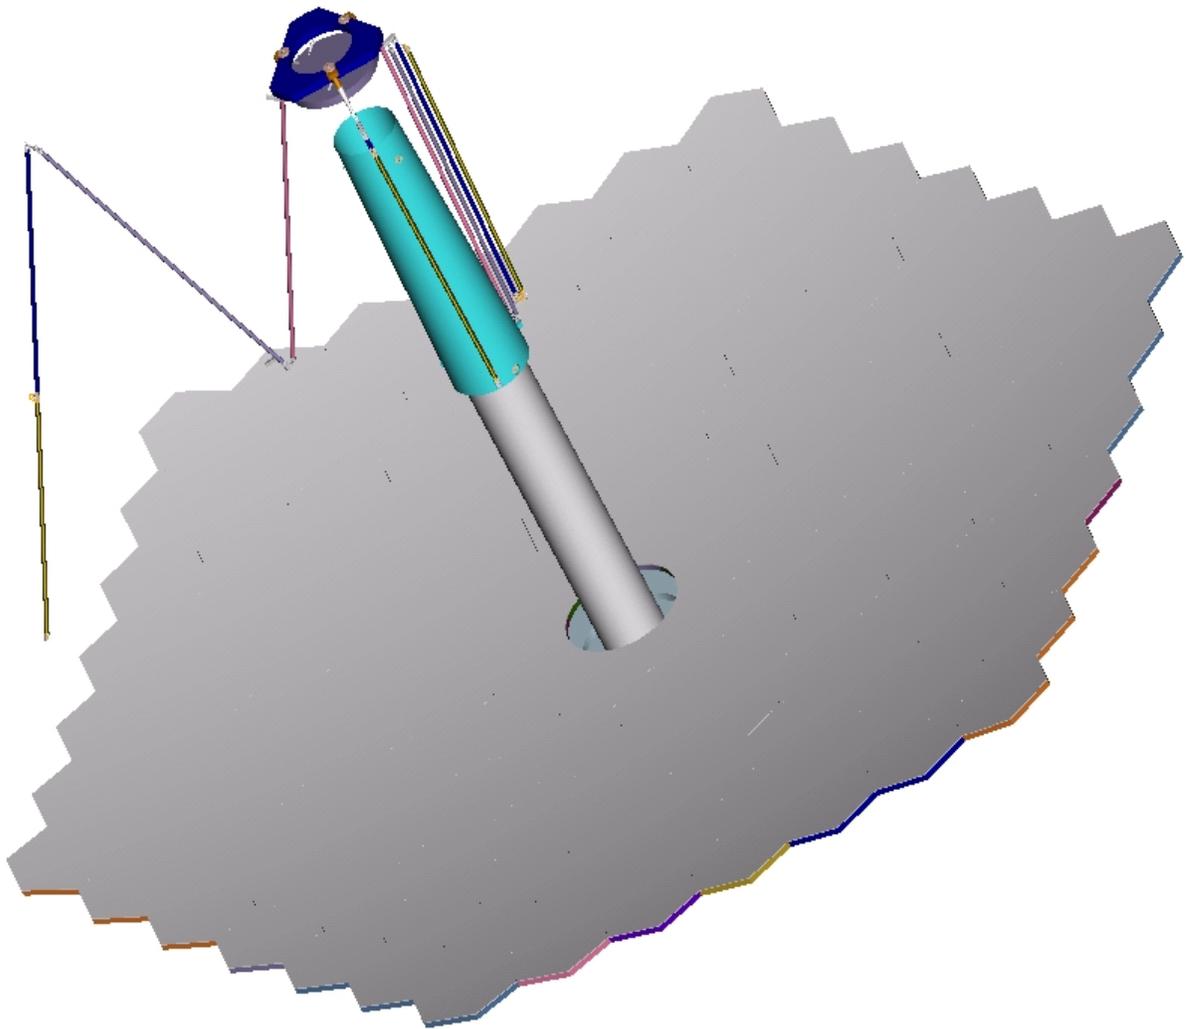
Rear View of Primary Showing Assembly Sequence
